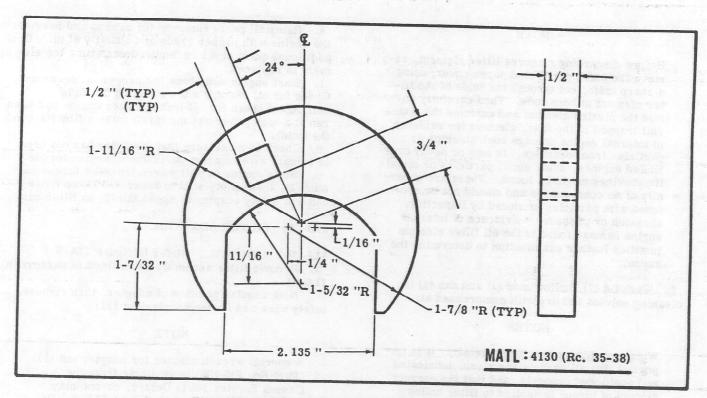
A-4. Oil Filter Adapter Wrench Fabrication
